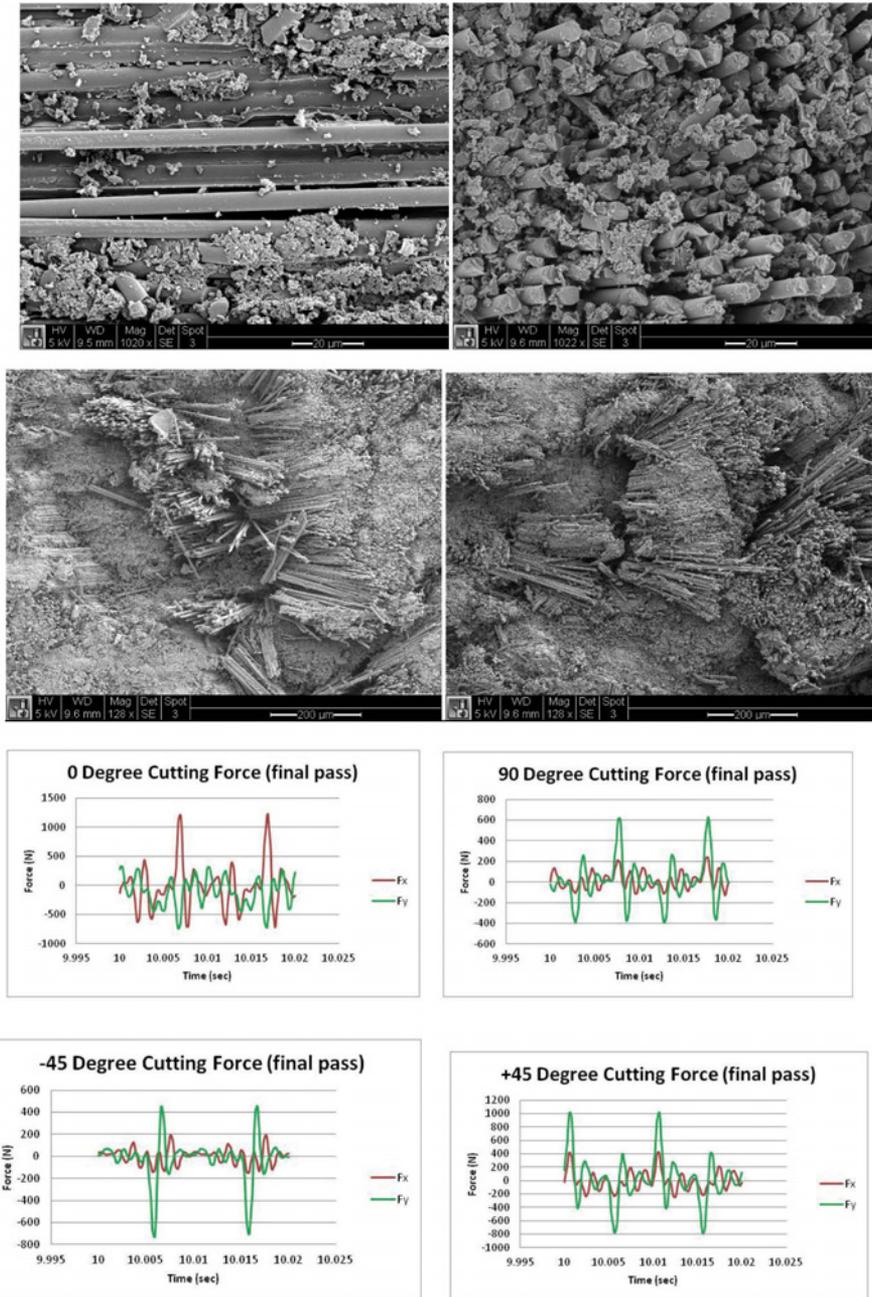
PCD edge trimmed UDL surface and typical cutting forces.
